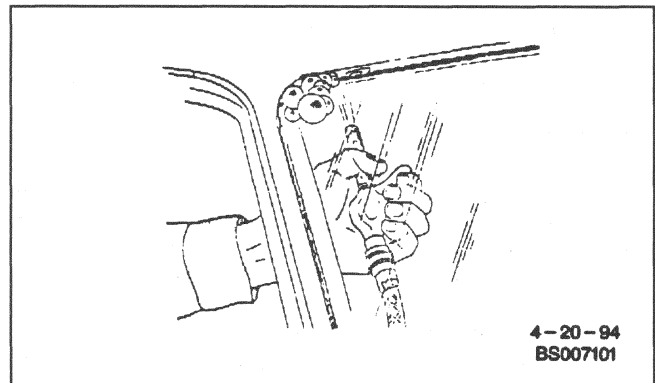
Air Hose and Bubble Solution Test of Windshield Glass Sealant
